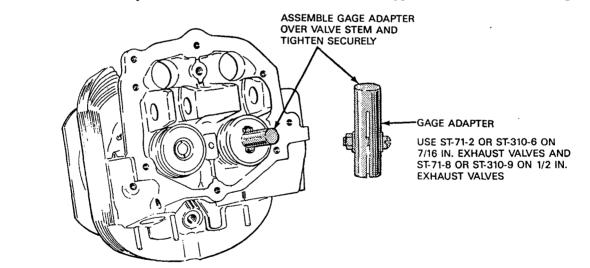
Gage Adapter Assembled on Exhaust Valve Stem
